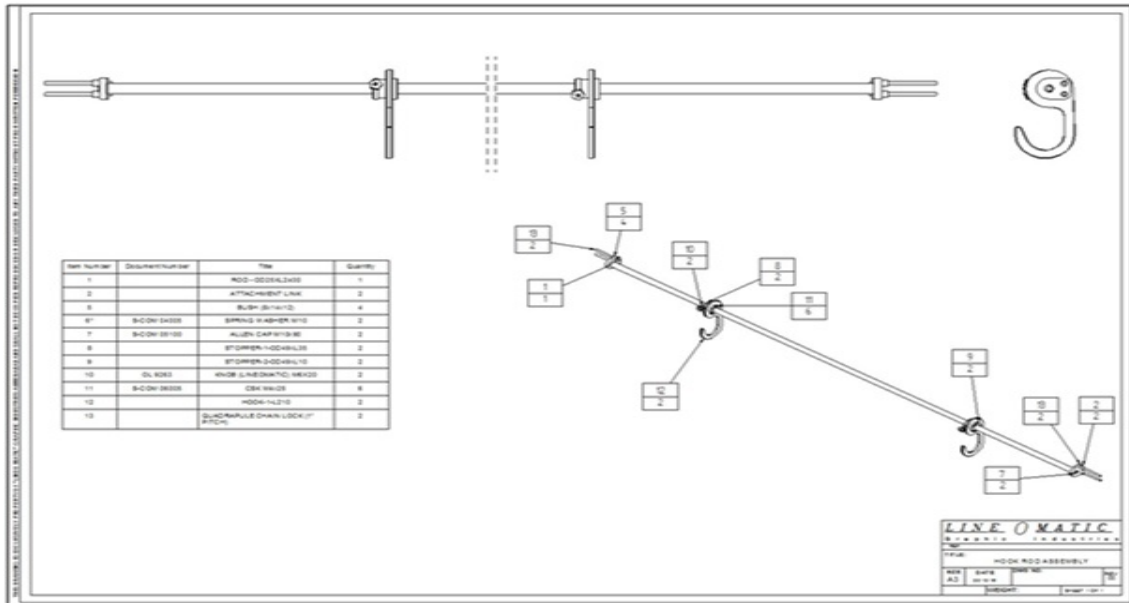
Assembly drawing of Hook/Gripper assembly with part list
